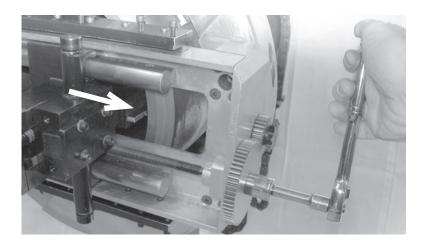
Turn the castle nut counter-clockwise to feed the tool toward the pipe I.D.
